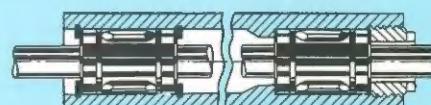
Simple Installations A Push Fit bearing secured in a through bored hole between snap rings (left), or in a shallow bored hole between an internal shoulder and a threaded plug (right).
